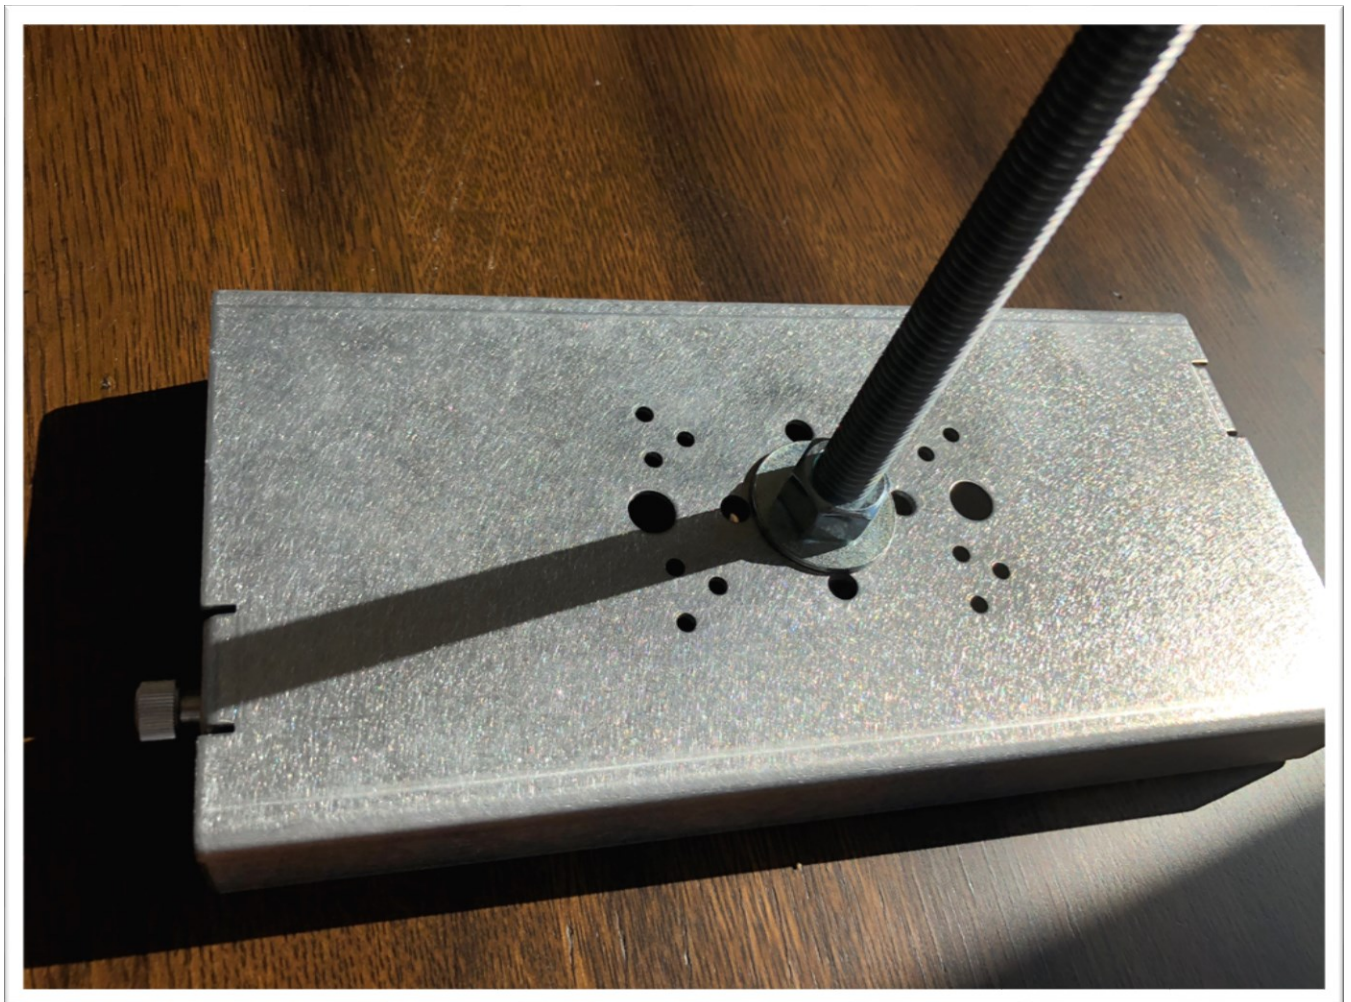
Sensor-02 Adapter Plate Attached to Threaded Rod (top view)
